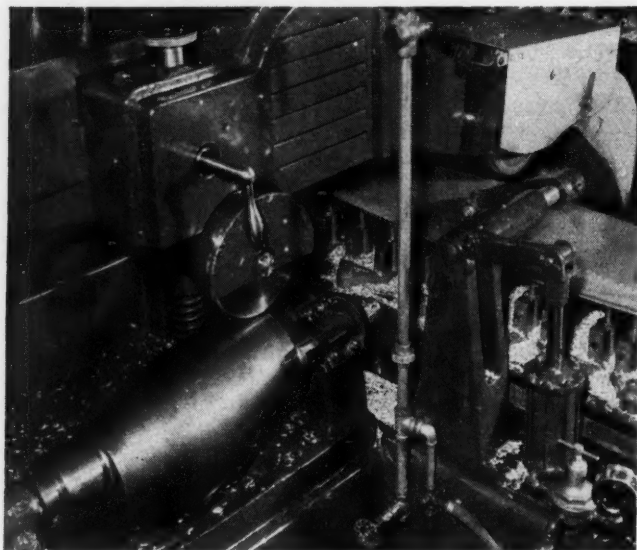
Rough milling camber side of rough blade forging. The movement of the cutter is controlled by a cam wheel operating in conjunction with a cylindrical cam.
